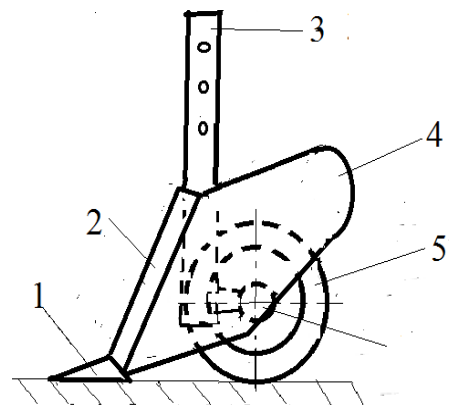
The proposed schematic design of the excavator which excavats furrow: 1-blade, 2-front separator, 3-column, 4-wing, 5-support wheel.
